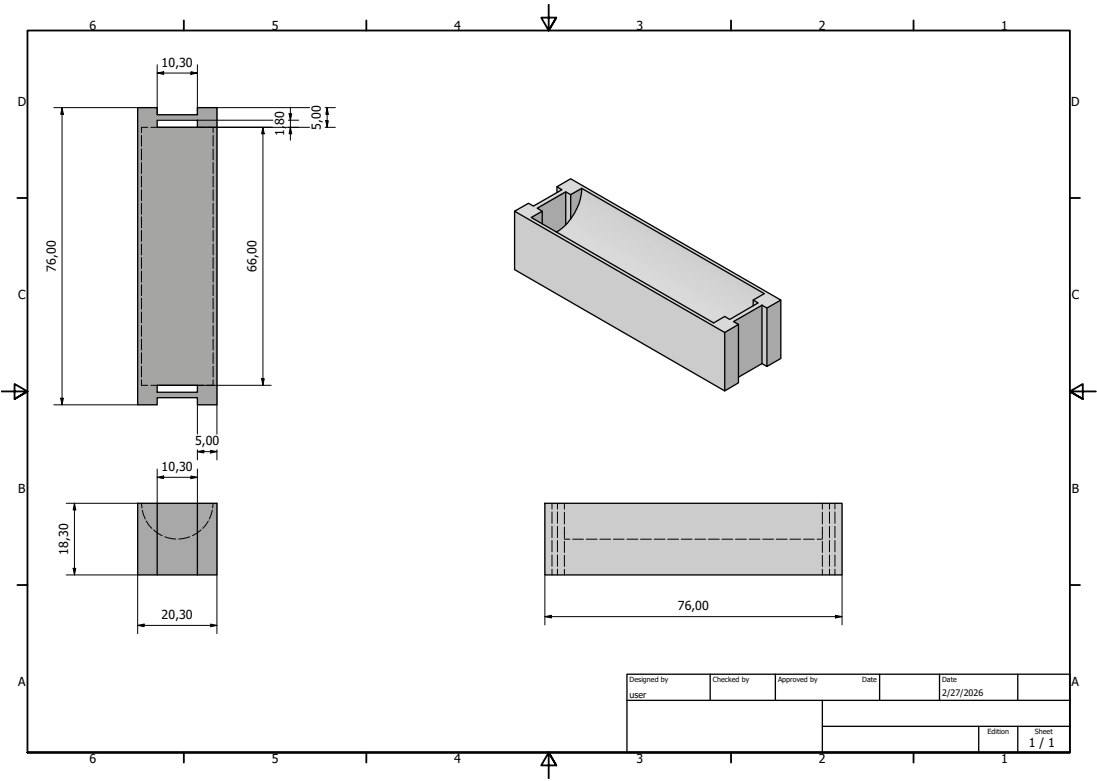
Edge battery support bracket – 2D manufacturing drawing with title block
